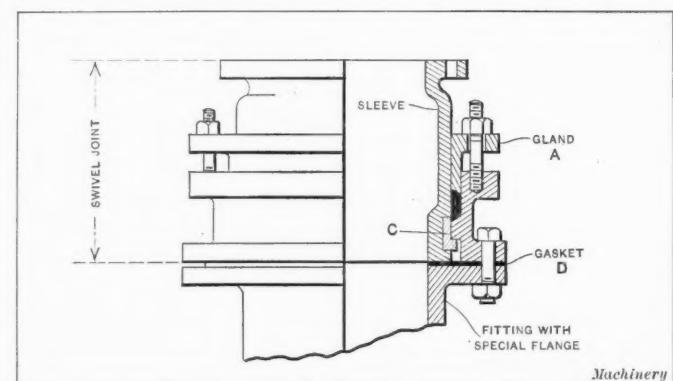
Detail of Crane Co.'s Swivel Expansion Joint
